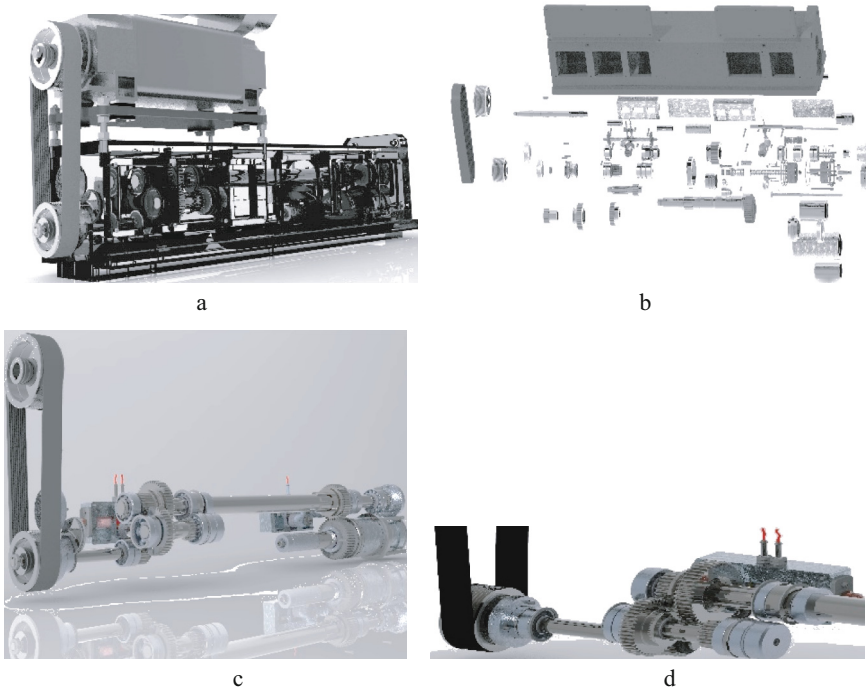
Three-dimensional model of SF68VF4 MMD unit: a – transparent assembly; b – section
